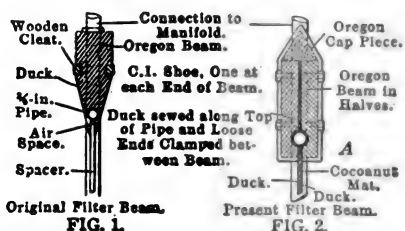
DETAILS OF FILTER-FRAME CONSTRUCTION.
